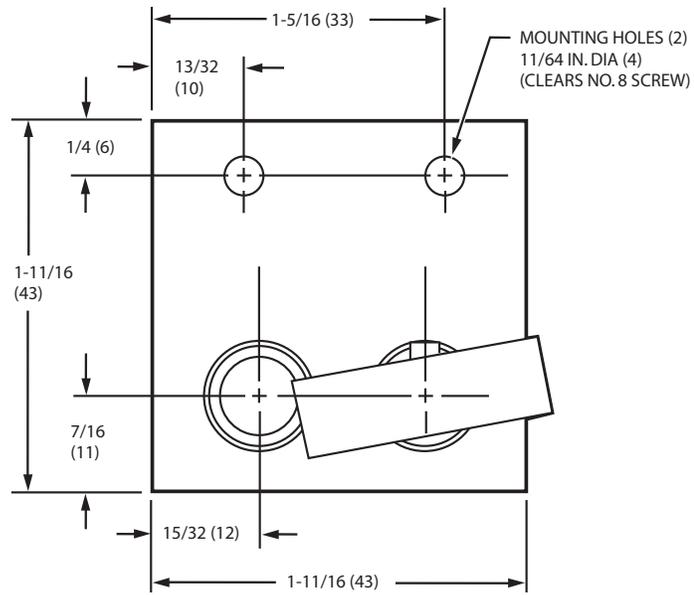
Q380 No. 1 mounting bracket and dimensions
